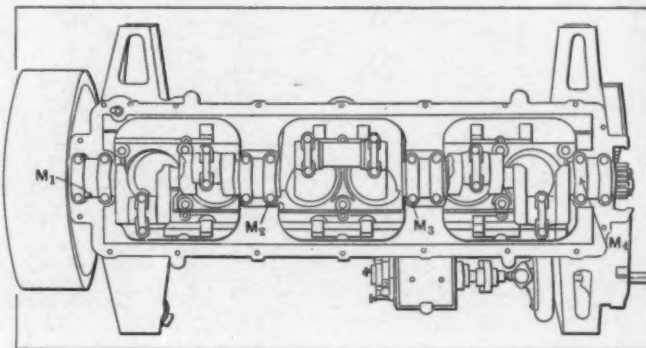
Looking into the crankcase with the bottom half off, showing the capped main bearings
